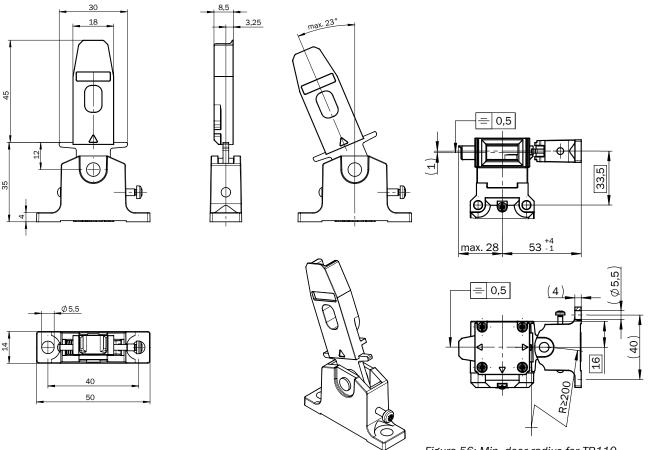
Dimensional drawing of TR110-XAFL hinged actuator (mm)
